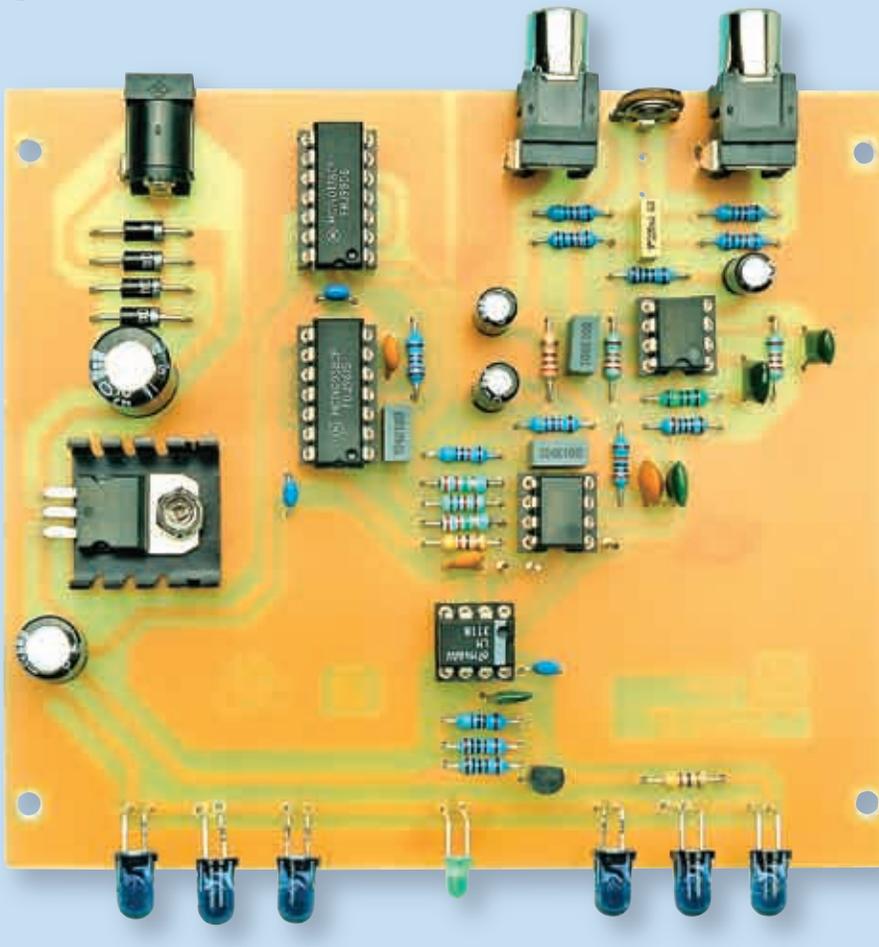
install the parts on the transmitter board as shown here, taking care to ensure that all polarised parts are correctly orientated. Below is a full-size photo of the assembled PC board.
